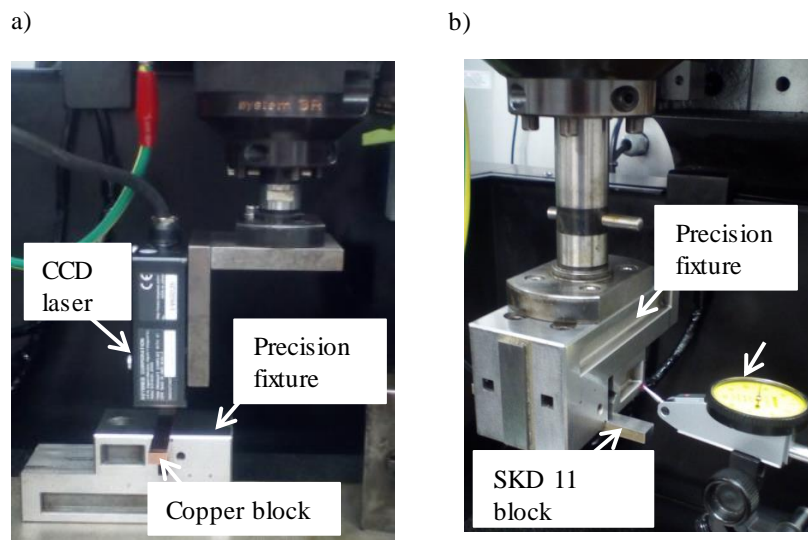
a) Parallelism error measurement. b) Correct positioning of the blocks in the machine tool.
